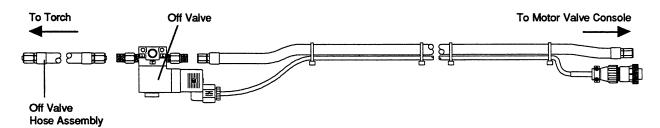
Motor Valve Console to Torch Lead Assembly 029940
